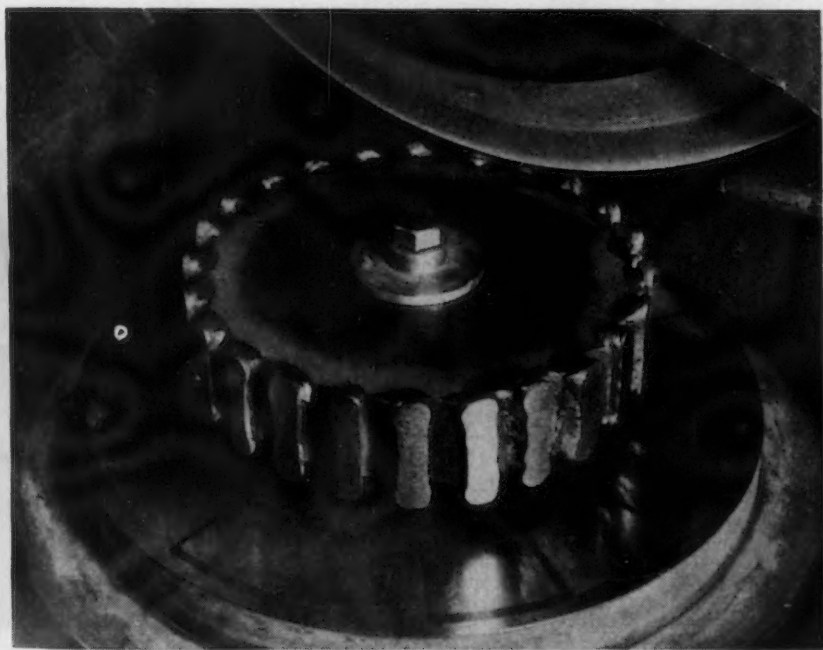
Surface grinding of the same cutter as shown in Fig. 1, using an Arter rotary type machine.
